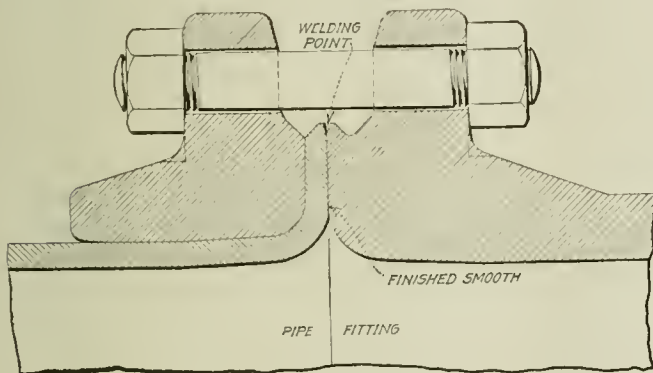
CONSTRUCTION OF SPECIAL WELDED JOINT
